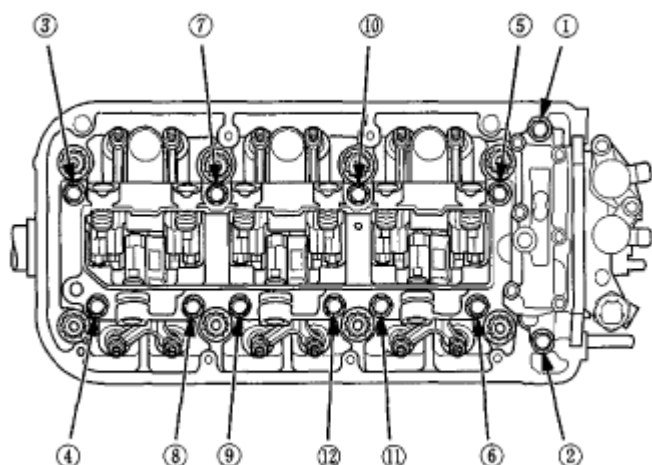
Identifying Rocker Shaft Bridge Mounting Bolts Tightening Sequence (Rear)
